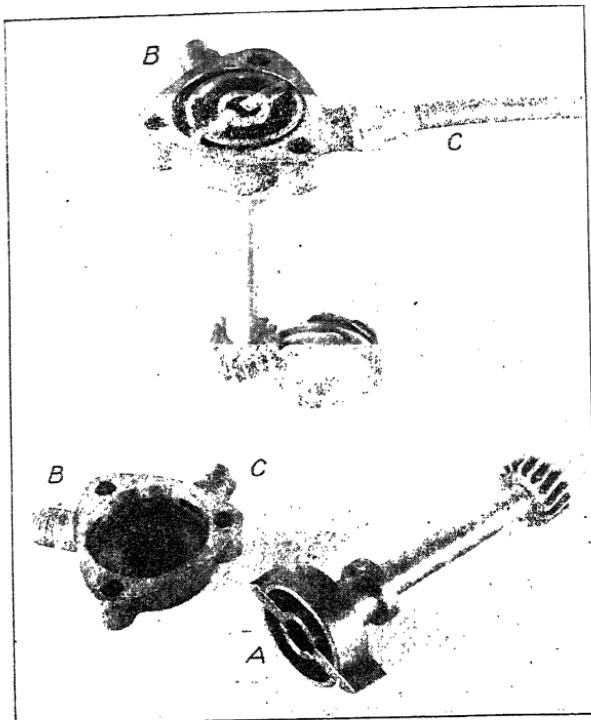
Disassembled and Assembled View of Vane-Type Pump
